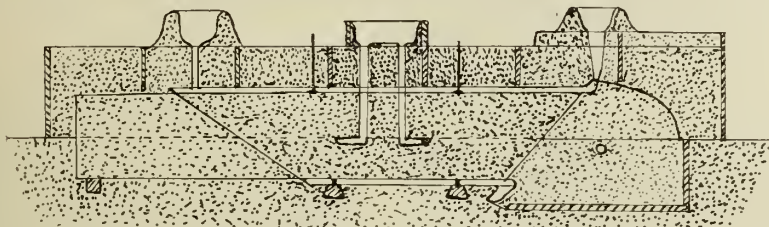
CROSS SECTION OF ASSEMBLED MOLD.
